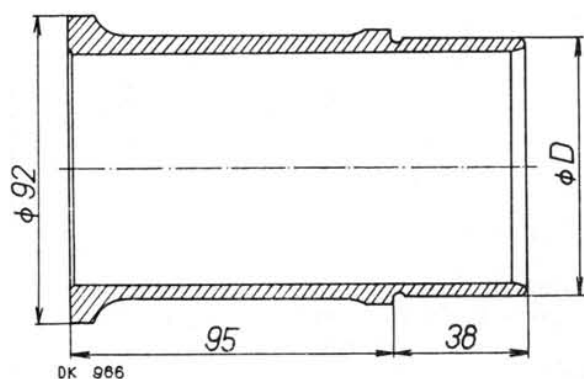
/2 - Outside Dimensions of Cylinder Liner
